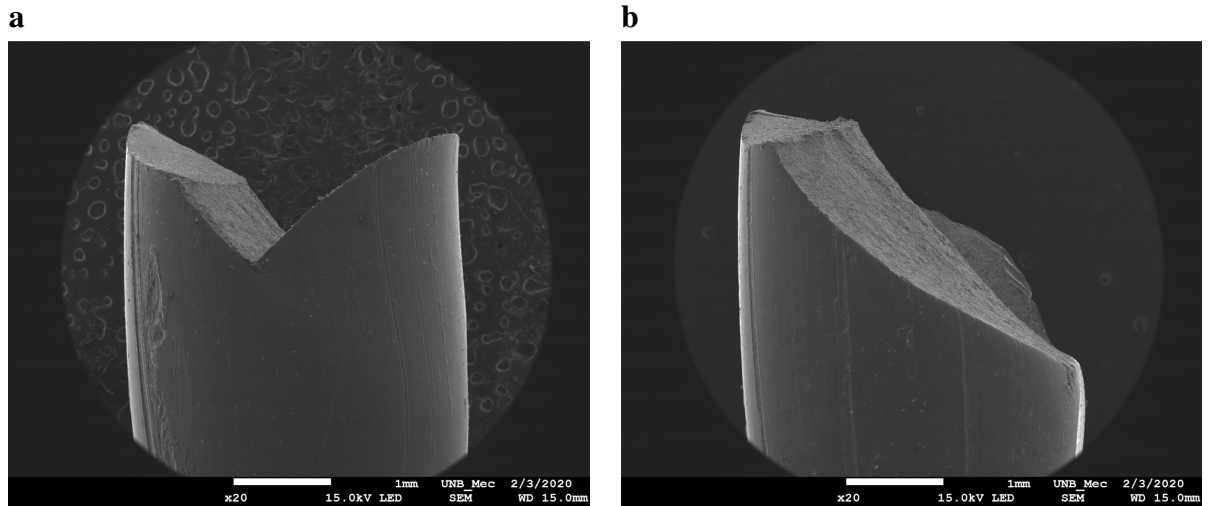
Final fracture surfaces observed on the wire specimens: (a) V-type of fracture in specimen no. 8 and (b) 45°-type of fracture in specimen no. 17
